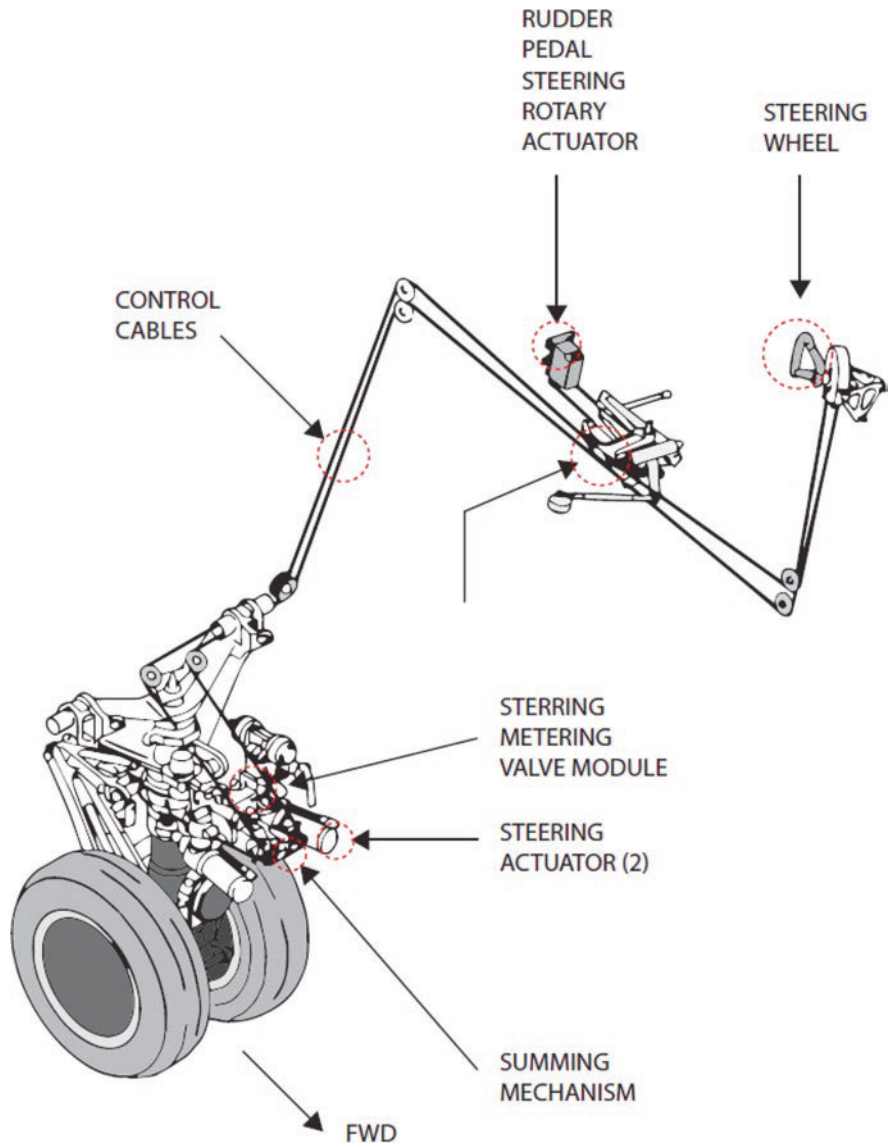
Boeing 737 aircraft nose wheel steering mechanism
